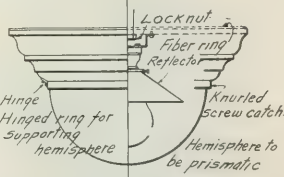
LIGHTING FIXTURE NO. 520, FOR LOW CEILINGS IN CORRIDORS AND ELEVATOR ENTRANCE HALLS
